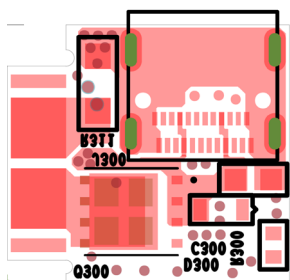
USB PD Board Printed Circuit Layout, Top.
